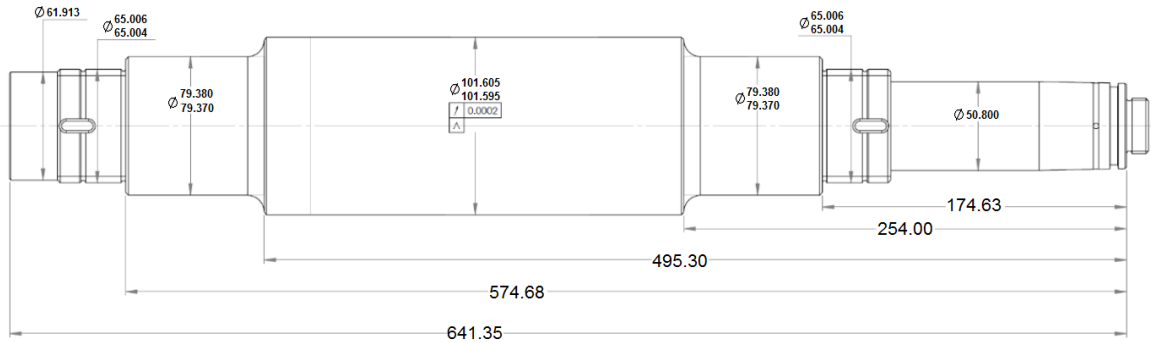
Smooth test rotor. All dimensions are in millimeters. Adapted and modified from Moreland [8].
